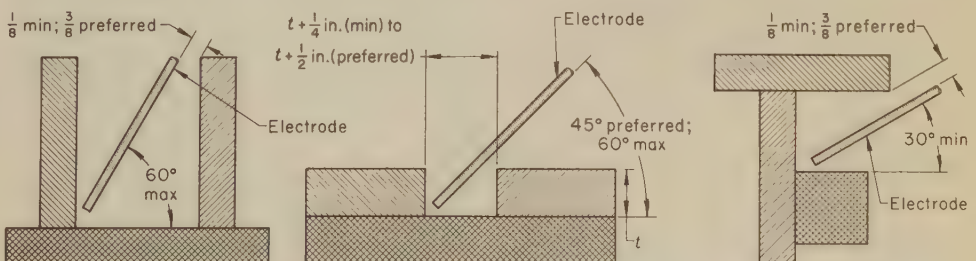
Typical electrode clearances used to avoid interference and provide welder visibility
